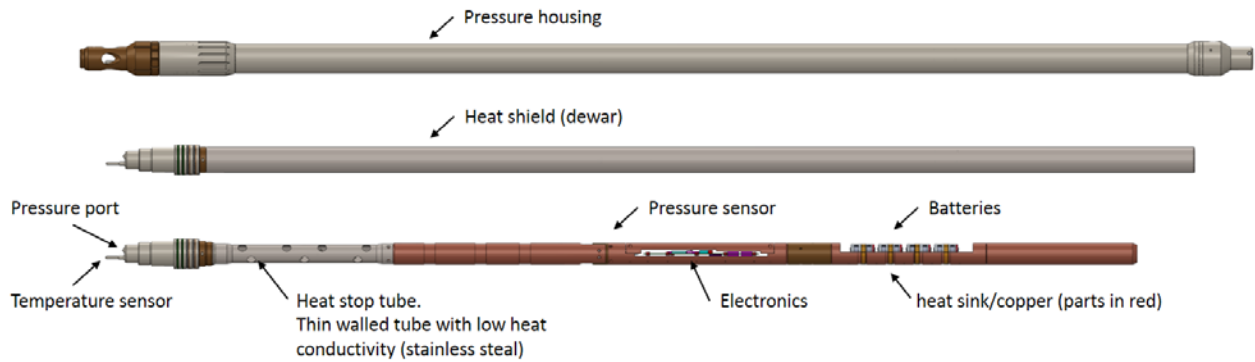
Top: The complete tool with pressure housing. Temperature sensor and pressure port is to the left (nose) and connection for the slickline wire is to the right in picture. Center: Pressure shield and nose protector removed. Picture show the nose of the tool and heat shield. Bottom: Heat shield removed. Picture show the inner parts of the tool. Electronics located in the middle of the tool.
